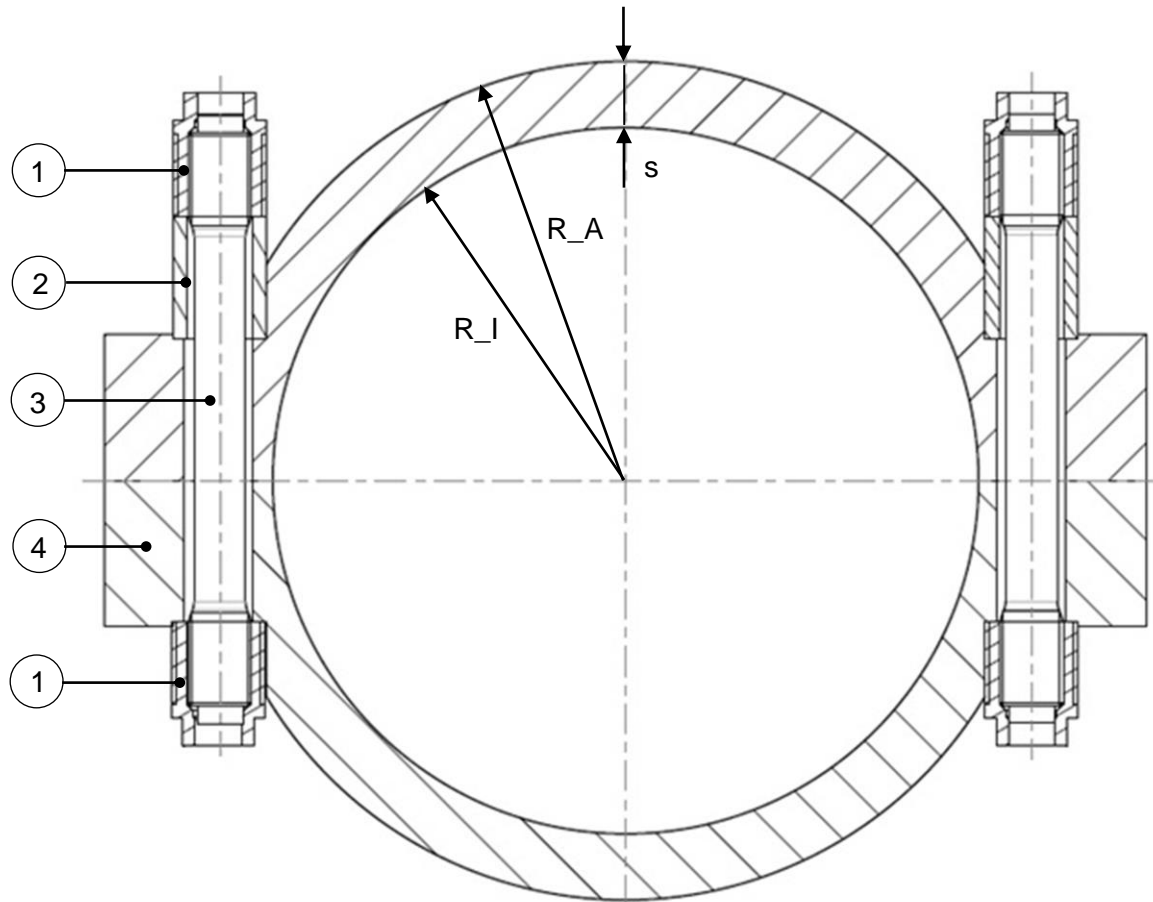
Cross section model of a bolted cylindric wheel chamber.
